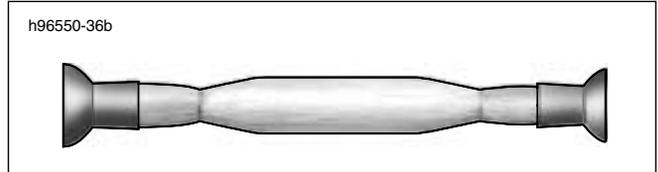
Valve Lapping Tool (Part No. HD-96550-36A)
